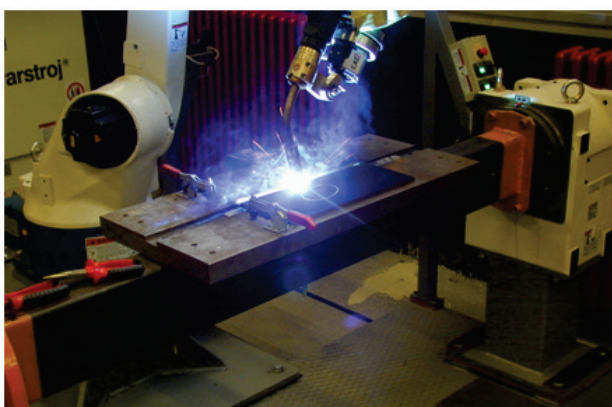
Robotic arc welding; arc sensor seam tracking
